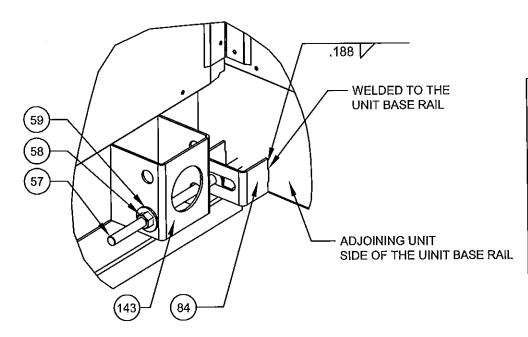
MULLION ASSEMBLY ATTACHMENT
